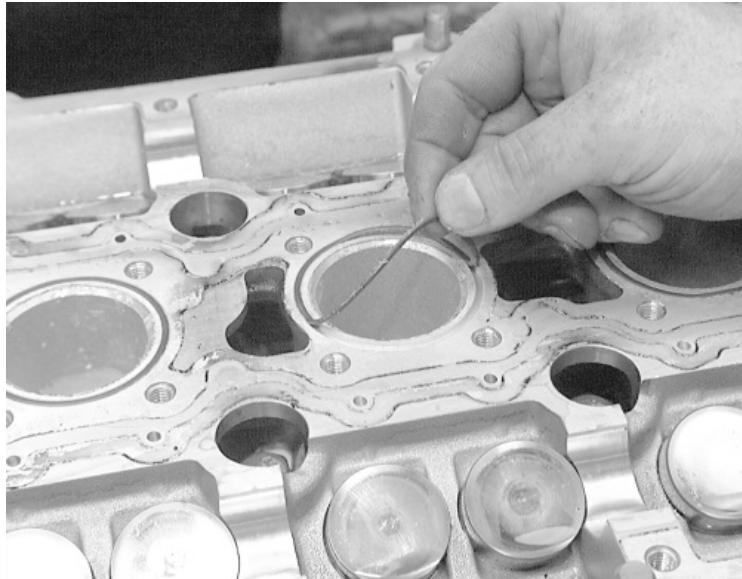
Remove and replace the O-rings around the spark plug holes
